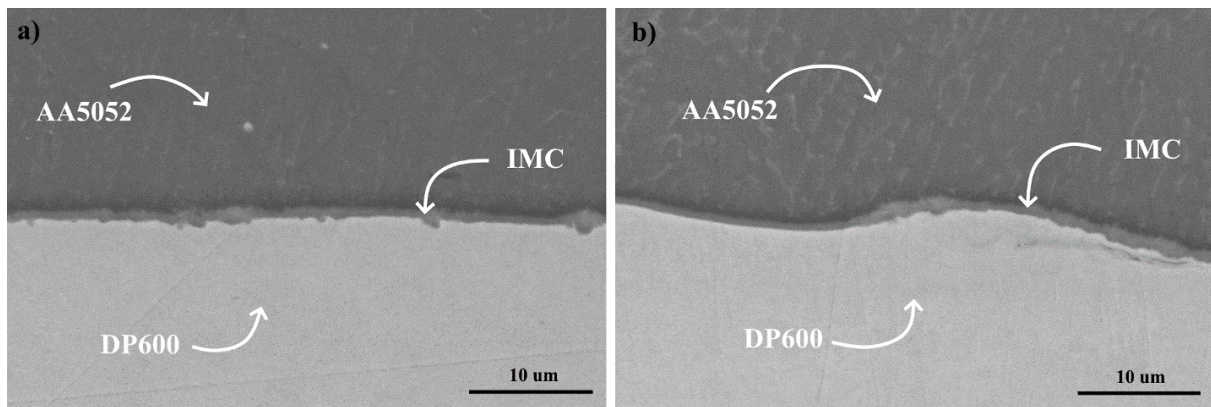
IMC formation near the center of weld for samples welded a)with AA4043 and b) without AA4043
